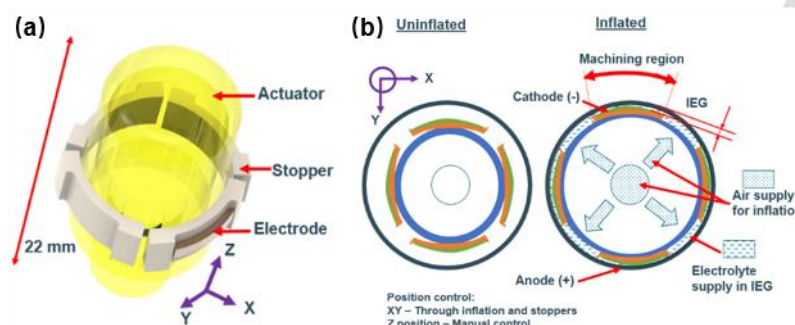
(a) Prototype of an inflatable actuator for ECM on an internal cylindrical surface (b) Schematic of the electrochemical machining process with soft-actuator (De Smet et al., 2023).
